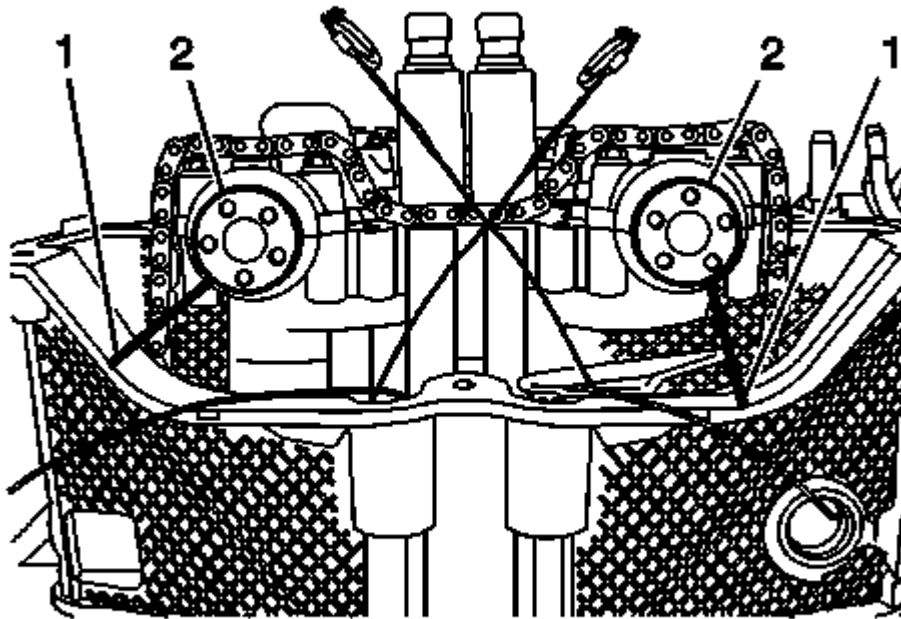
Aligning Marks On Cylinder Head In Relationship To Camshaft Actuator Notches
